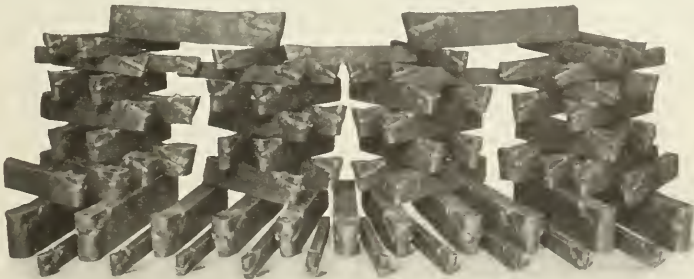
Cutting Tools with Points welded onto Shanks
